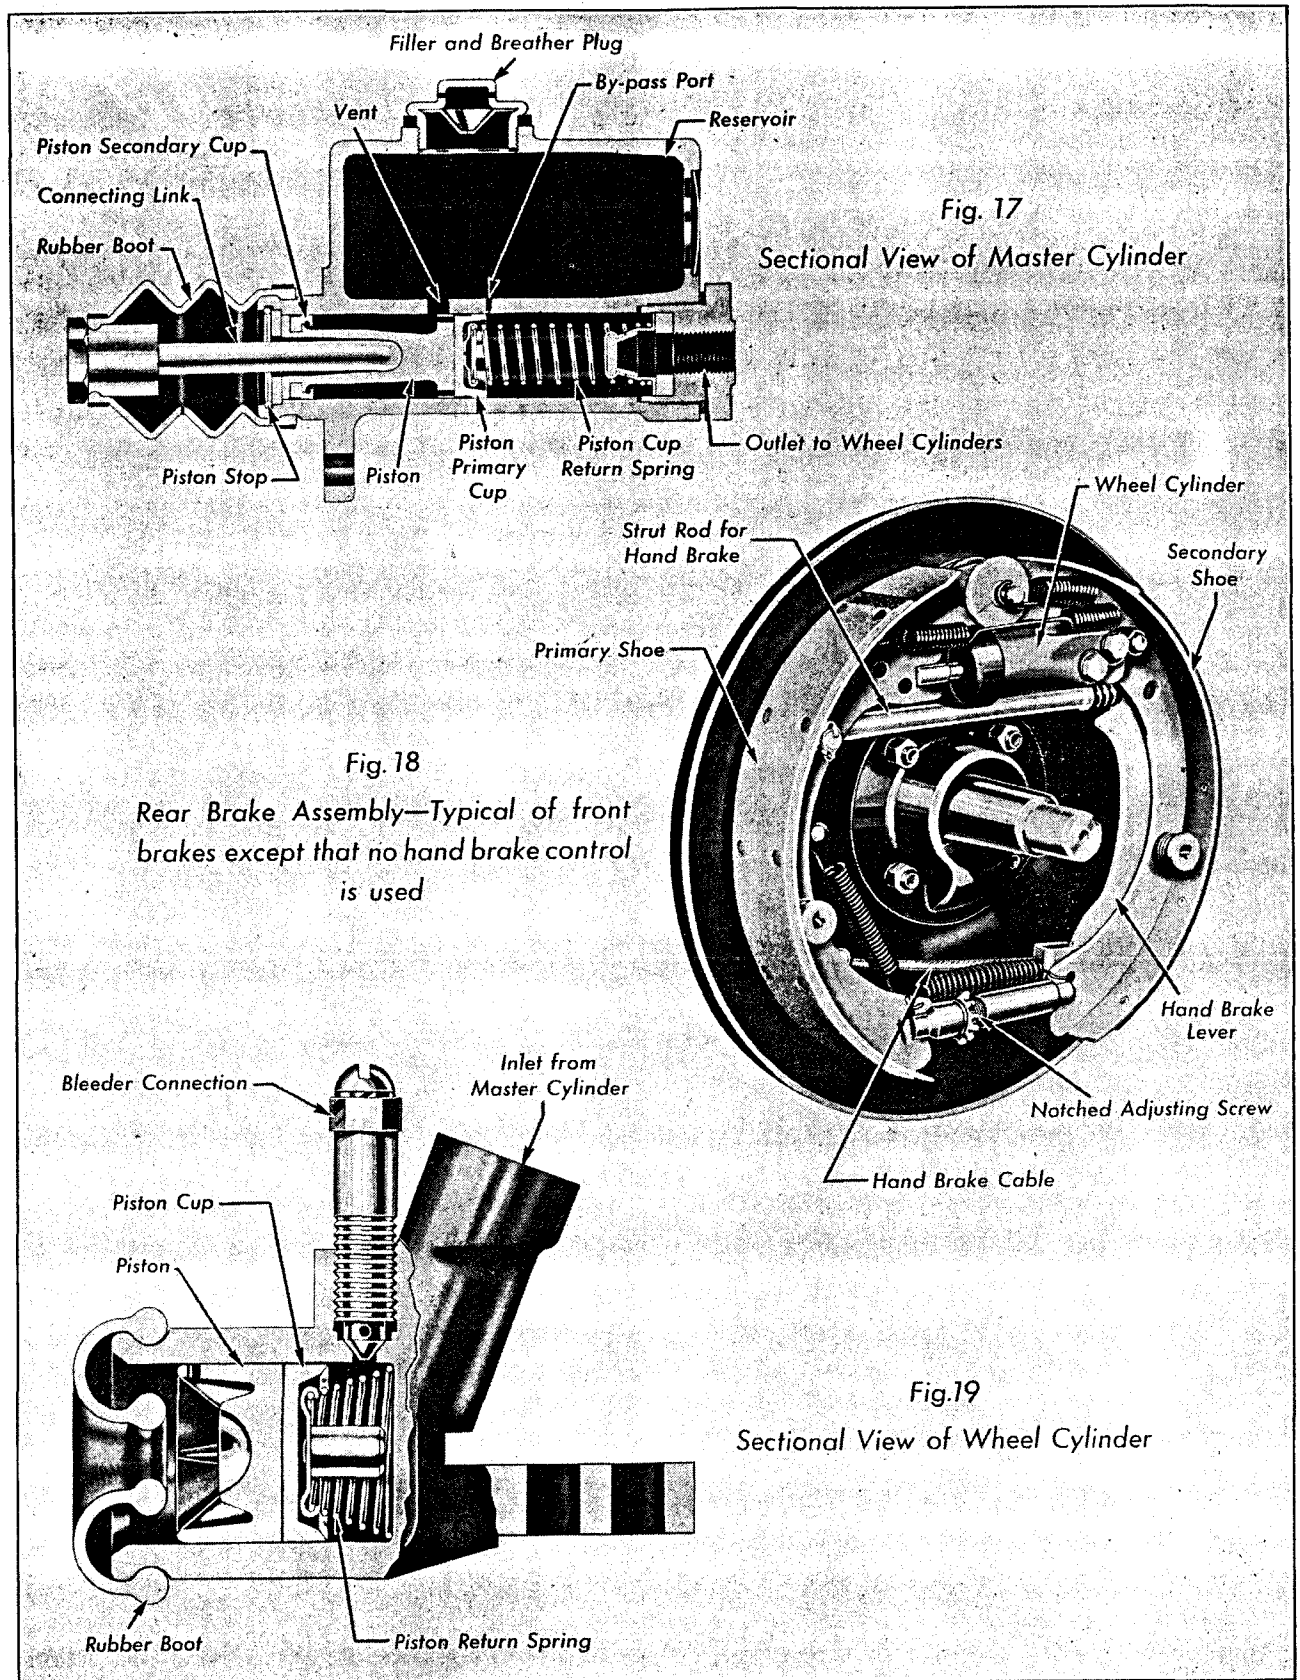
Brake Cylinders and Wheel Assembly—LaSalle
